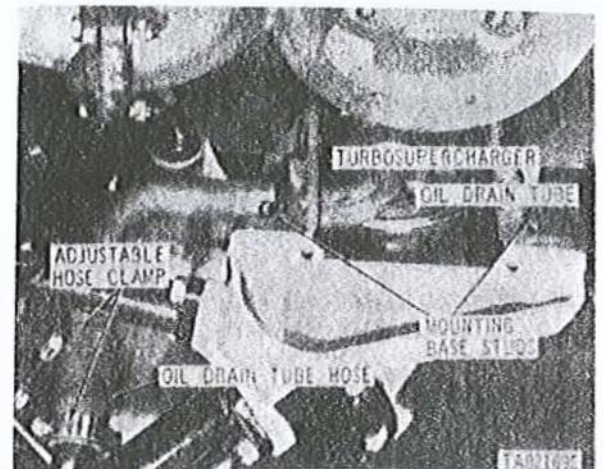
Loosening or tightening turbosupercharger oil drain tube hose connection.
